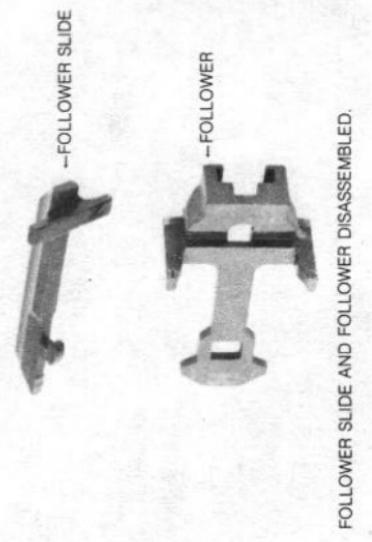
Disassembly / assembly of magazine follower group (1 of 2).
